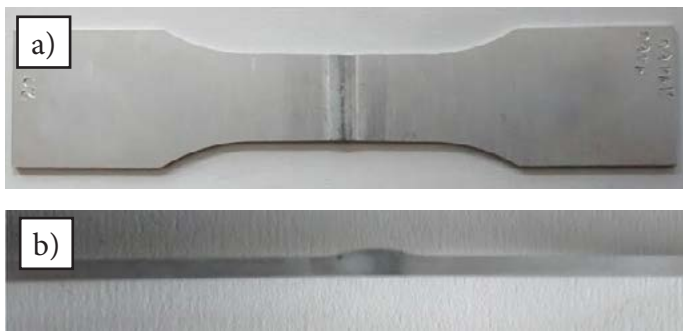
Specimens used in the tests involving the MIG butt welded joints made of aluminium alloy 1460: a) outside view; b) welded joint profile
